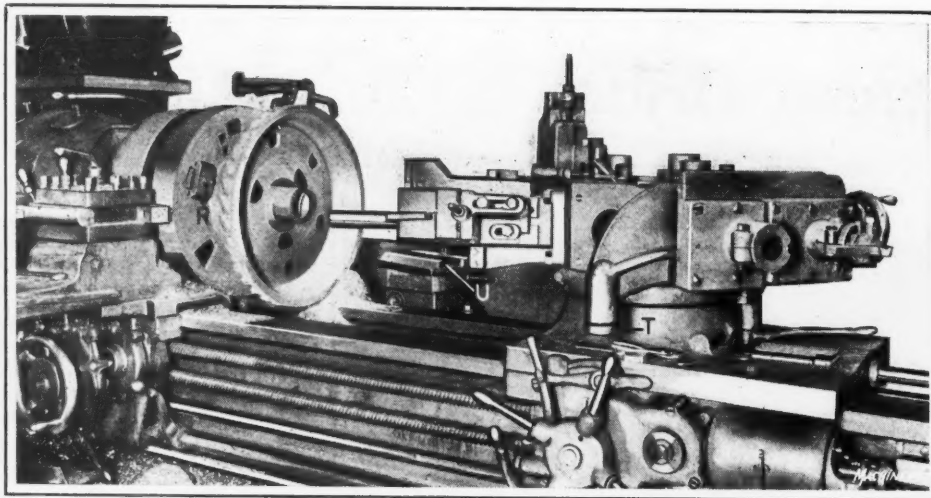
Tooling Equipment provided on Turret Lathe for finishing the Hoist Drum Casting in One Operation
